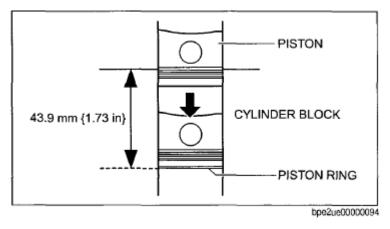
Pressing Piston Ring Parallel Into Cylinder Using Piston
